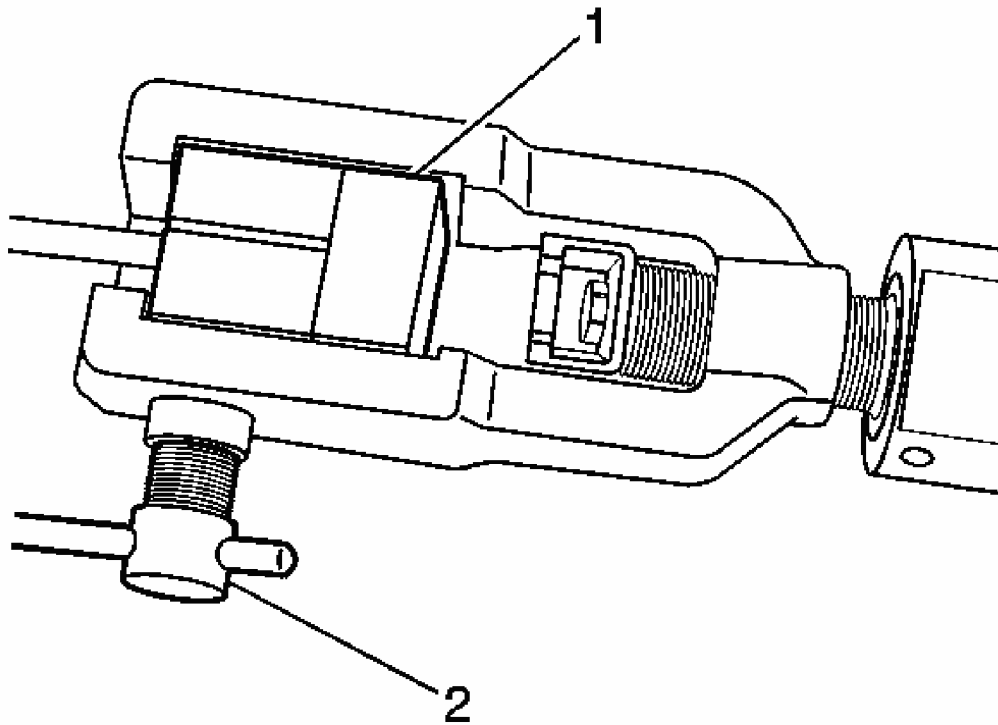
Chamfering Pipe Using De-Burring Tool
